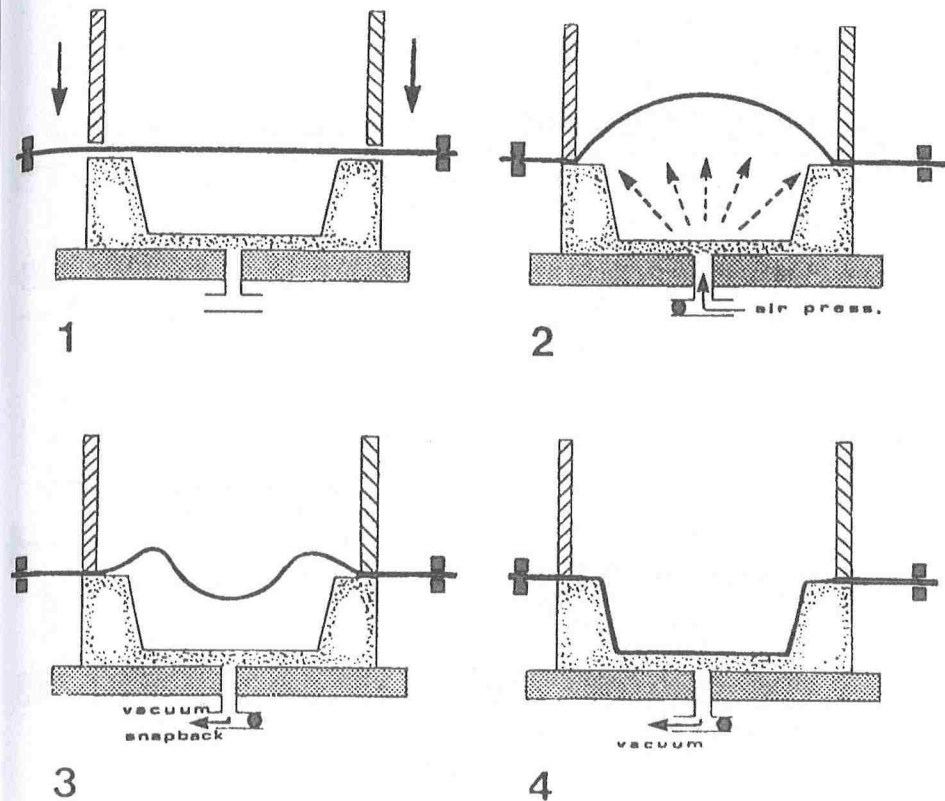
Snapback female vacuum forming: (1) preheated sheet clamping; (2) bubble blowing/sheet prestretching; (3) snapback of sheet; (4) vacuum forming.
